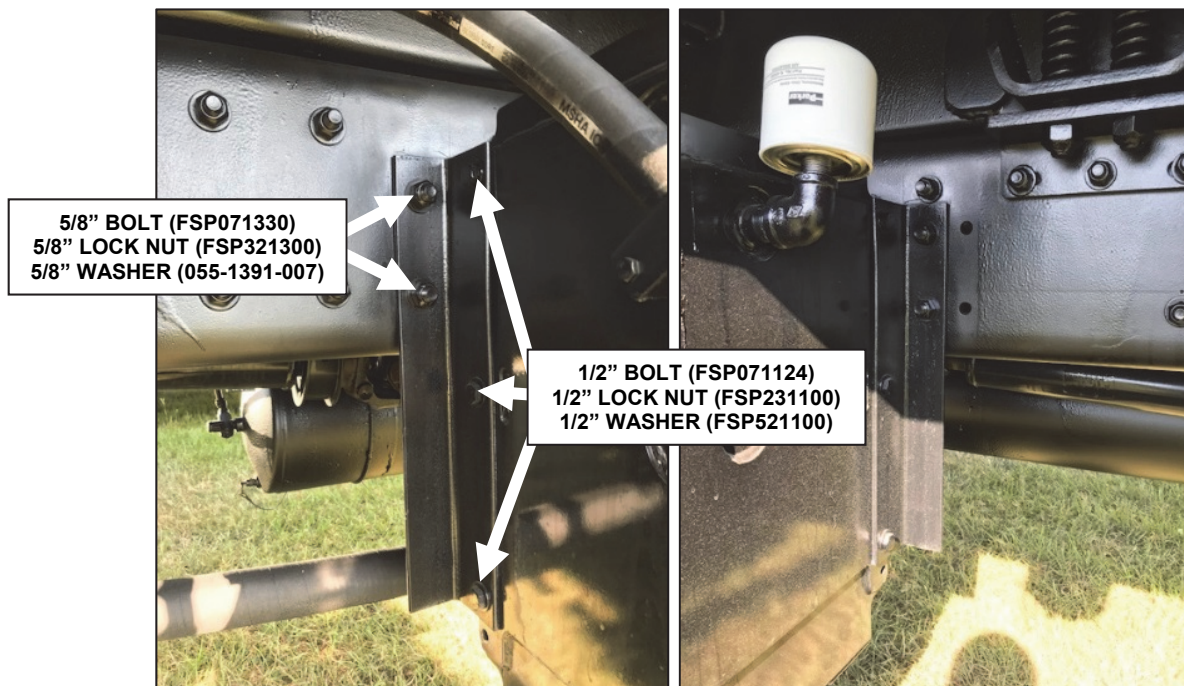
Hydraulic Oil Tank Mounting Bracket Locations (Each Side of the Hydraulic Oil Tank)
